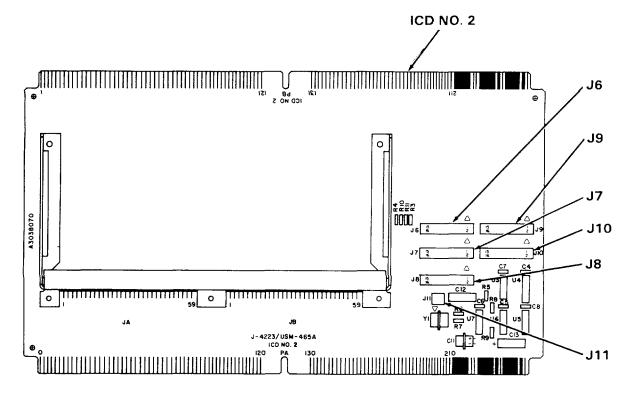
Cable Connection Points for Peripheral Board Test (Sheet 2 of 2)
